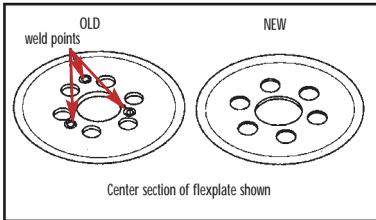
Redesigned flexplate for 4.0L Ford engine.
